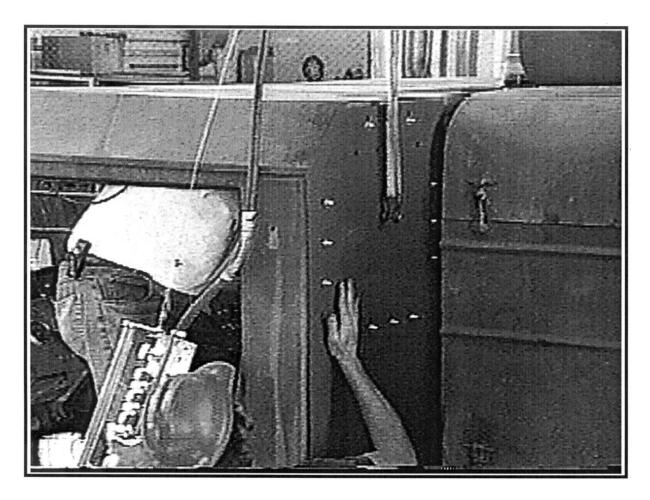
Install Mounting Armor Brackets to the driver's-side rear cab armor panel.
